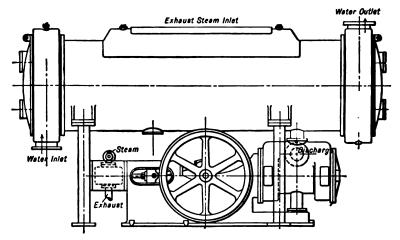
Surface Condenser with Wet Vacuum Reciprocating Pump, for Medium-Size Installations.
